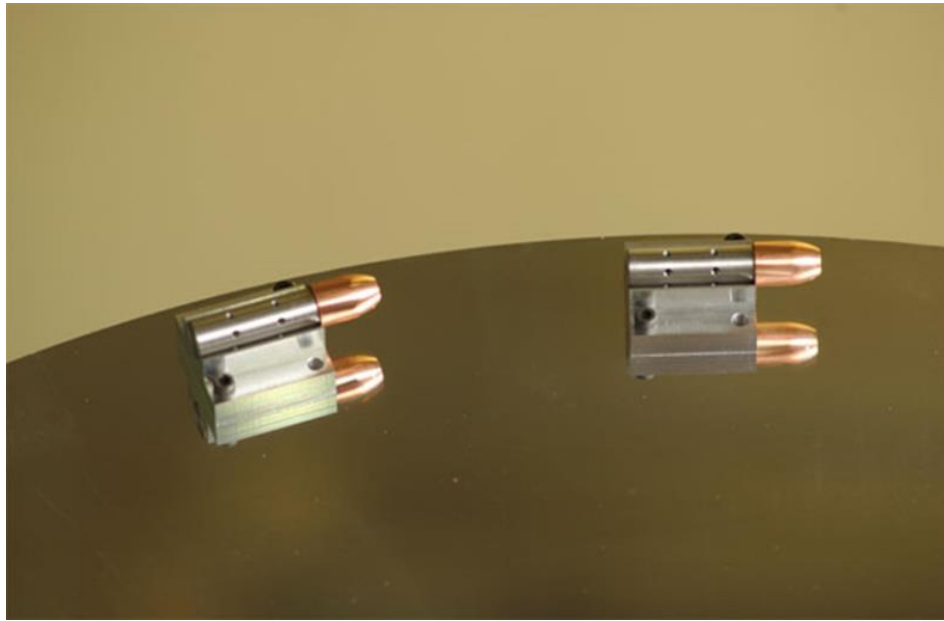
Manufacturing setup for SRM 2460 Standard Bullets: each bullet was fastened to a cylinder, which was mounted on a “V” block set on an aluminum wheel. 20 SRM bullets were manufactured at the same time. The cutting diameter was 22.5” (572 mm).
